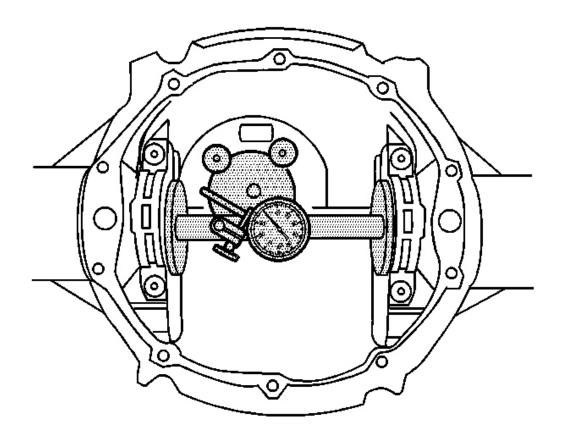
Measuring Shim Thickness Using J 8001 Courtesy of GENERAL MOTORS CORP.
